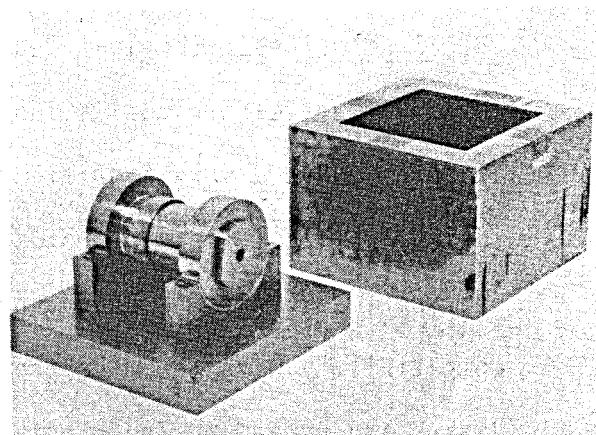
TEST RING IN JOURNAL-BEARING RING-HOLDER, AND PARTIALLY COMPLETED PRESSURE VESSEL
